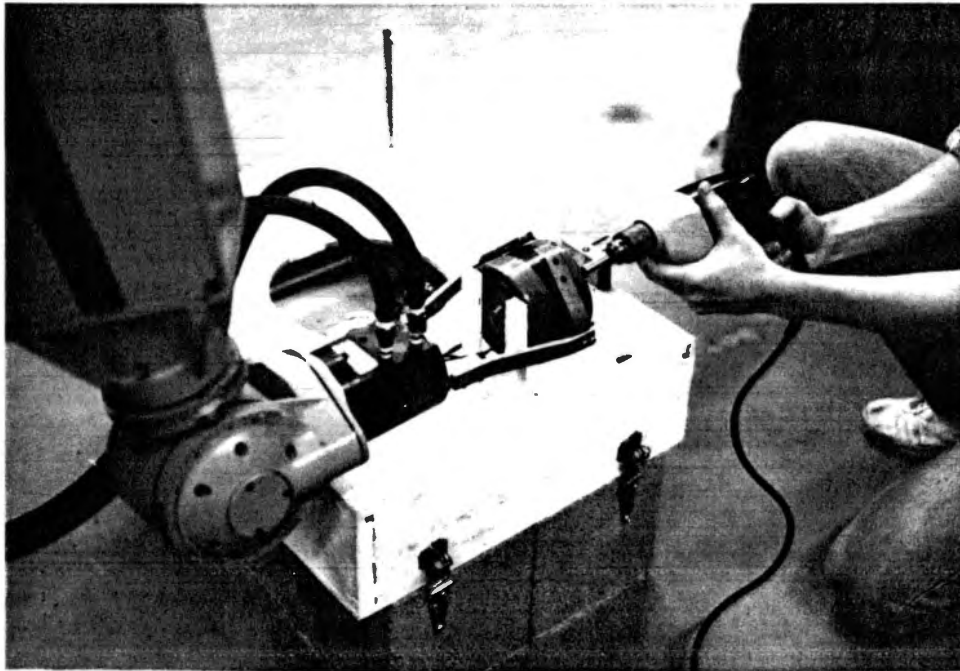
Human Worker Threading Nuts onto Motor Bolts
